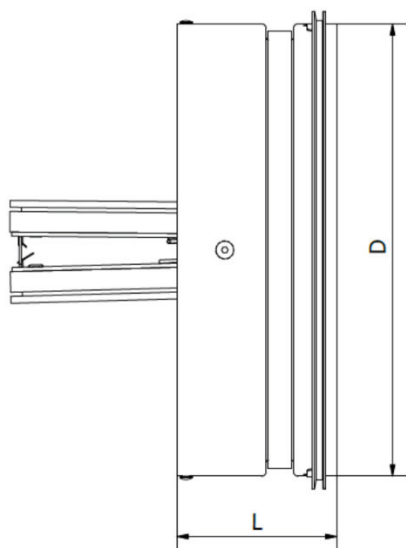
FDA-BU-KW, fire damper with thermal fuse mechanism and air valve.
